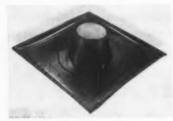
Formed laminate of PVC sheet surfaced with PVF film and embossed by hot pressing with a wire screen prior to vacuum forming. Note depth of draw and sharpness of definition.
